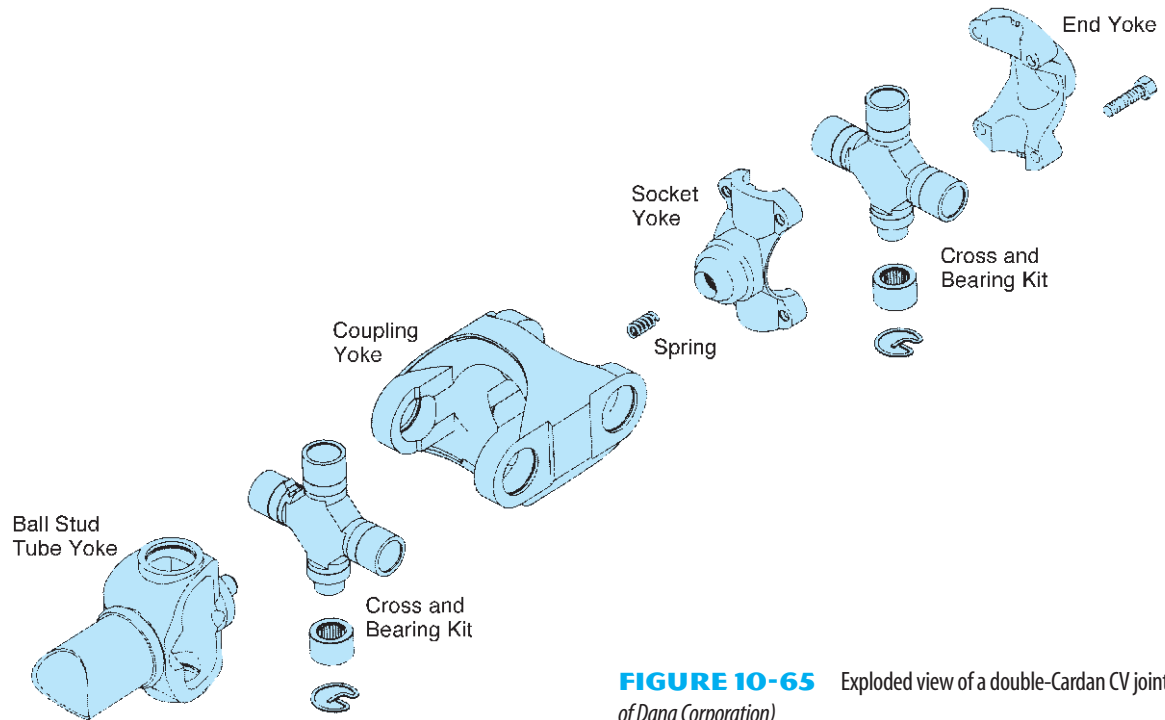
Exploded view of a double-Cardan CV joint. (Courtesy of Dana Corporation)
